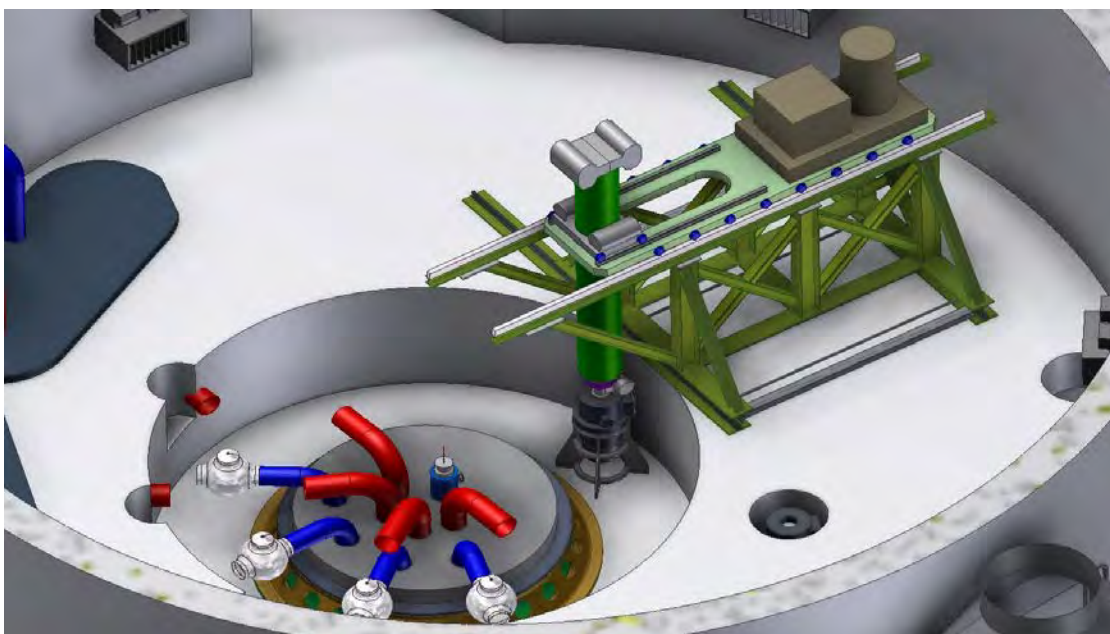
Fuel Unloading Machine – in Transfer Position
